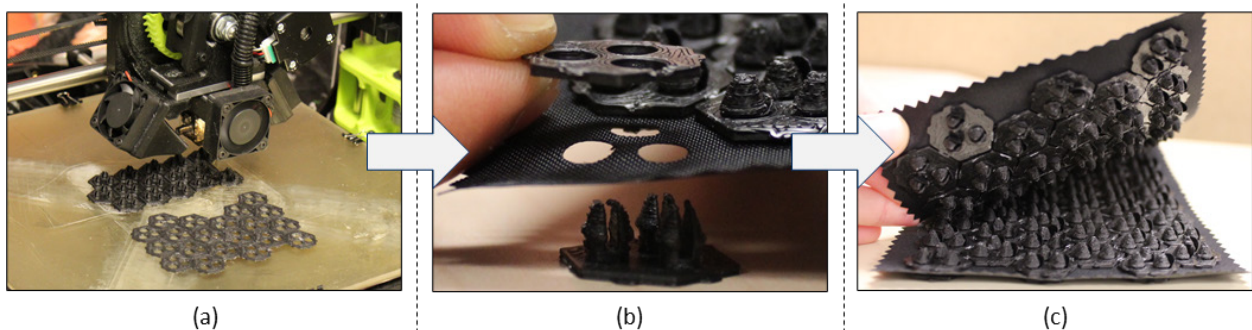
Fabrication process of the internal sheet-attached tiles. (a) The bottom and top tile parts featuring grooved pegs and through holes are 3D printed in batch quantities using a Lulzbot TAZ 6 with the standard toolhead using ABS filament at 235°C. (b) These two tile parts snapped into each other through a nylon fabric layer which is perforated using Cricut Maker desktop CNC machine. (c) The assembly of two opposing layers of internal sheet-attached tiles are finalized.
